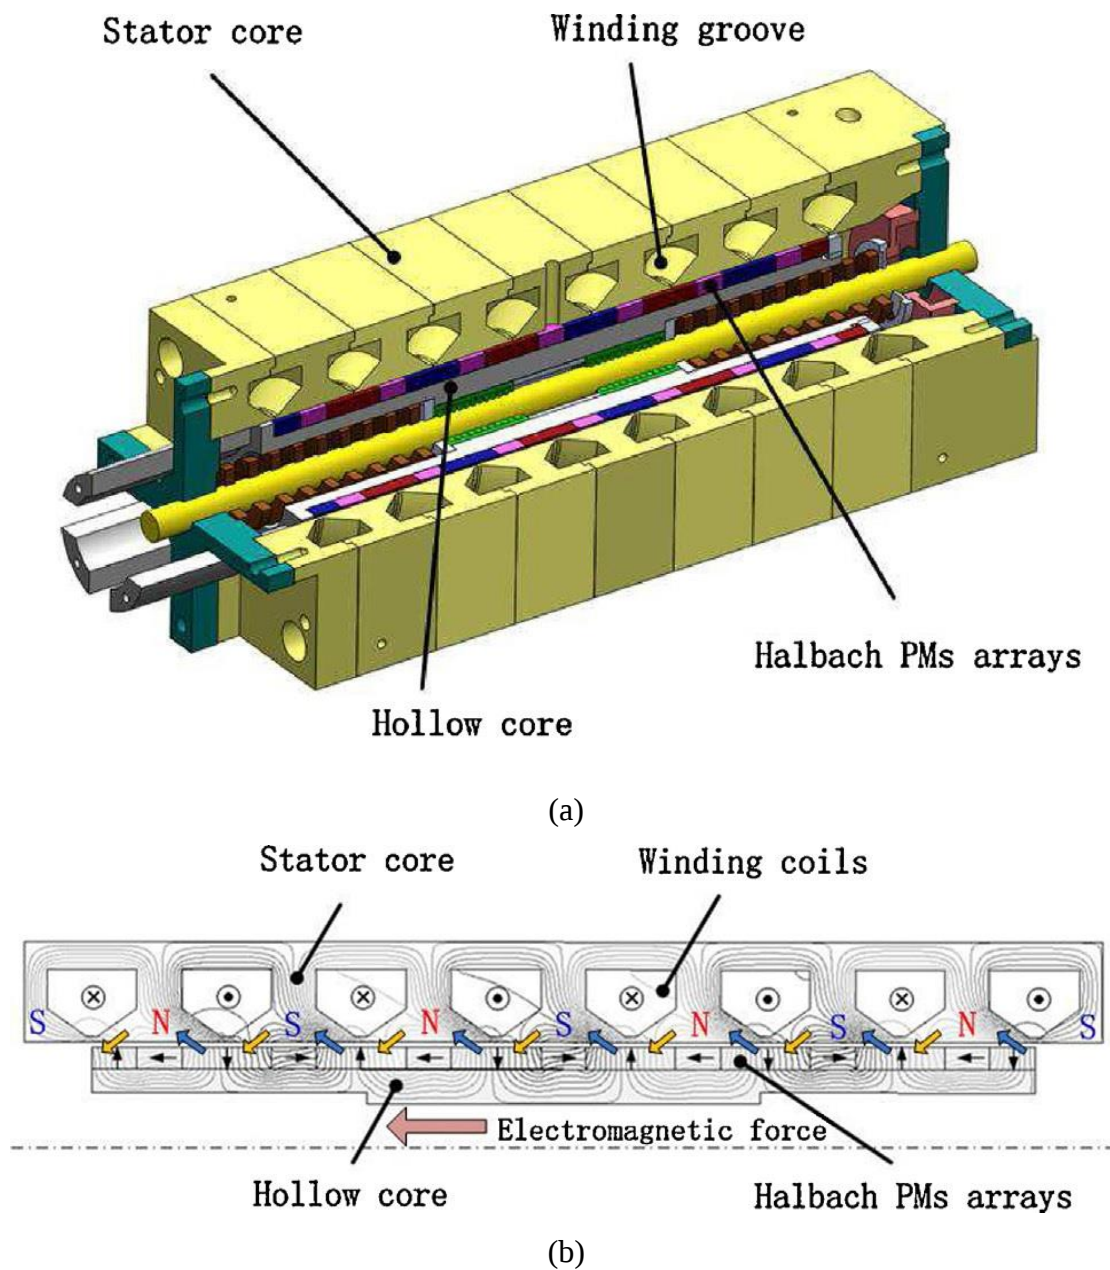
Tubular linear oscillatory motor used as a hydraulic servo pump (a) Overall pump assembly (b) Schematic for the stator and permanent magnet mover poles [33]
